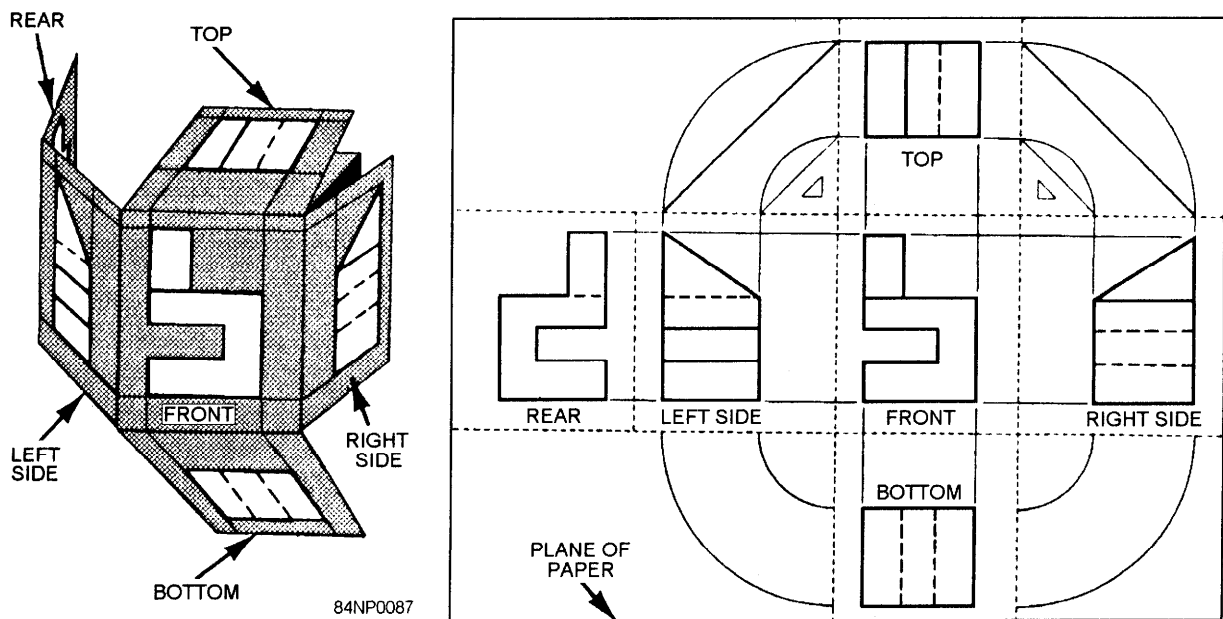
American standard arrangement of views in a six-view third-angle multi-view projection.
